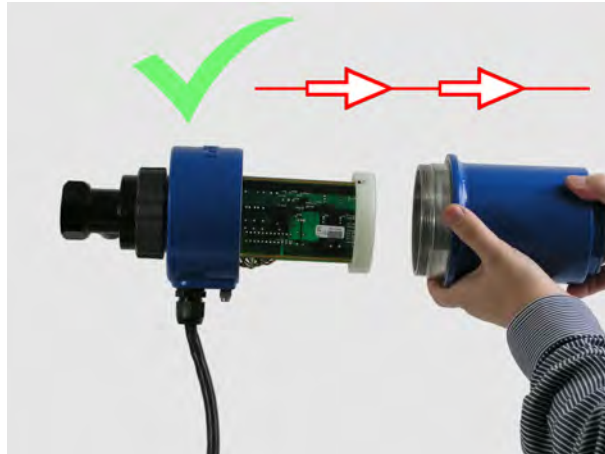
Do not allow the cover to slide along the printed circuit boards
